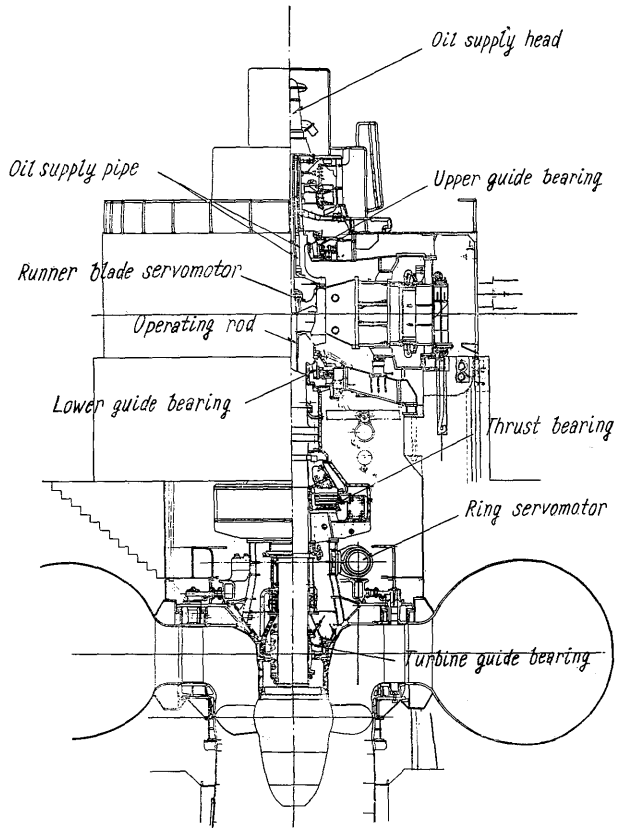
Cross-sectional view of Kaplan turbine and generator (Oyodogawa No. 1 Power Station)
